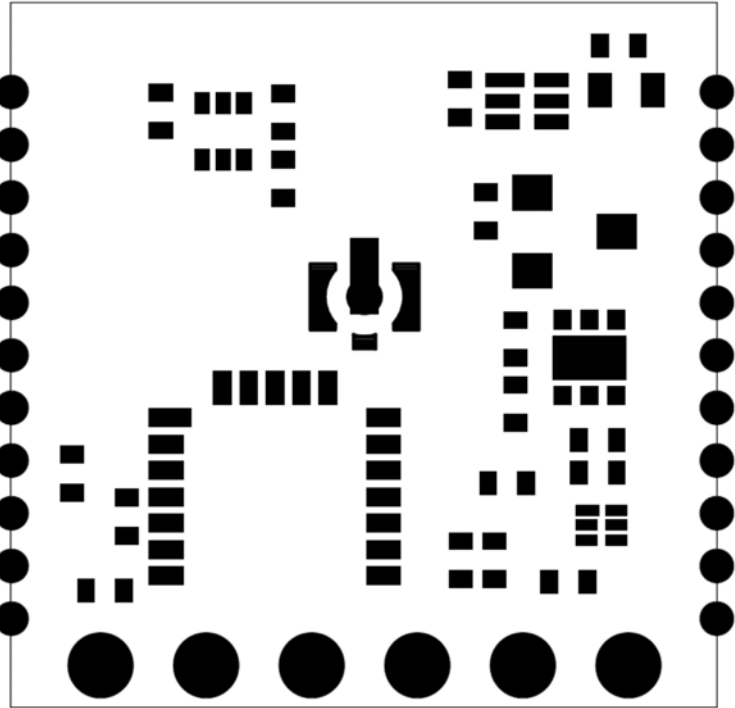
INTERFACE ADAPTER BOARD SOLDER MASK
